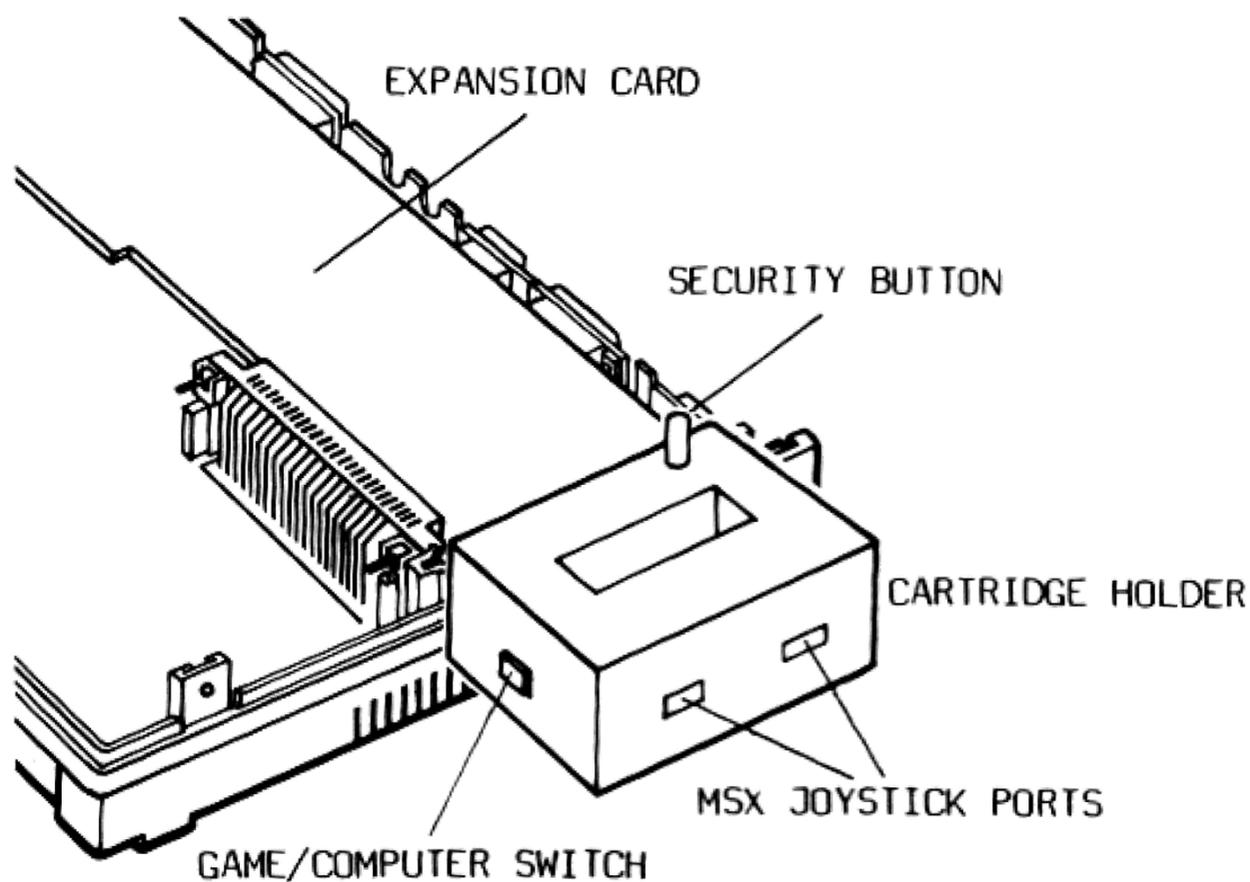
Connecting the Cartridge Holder and Expansion Card
